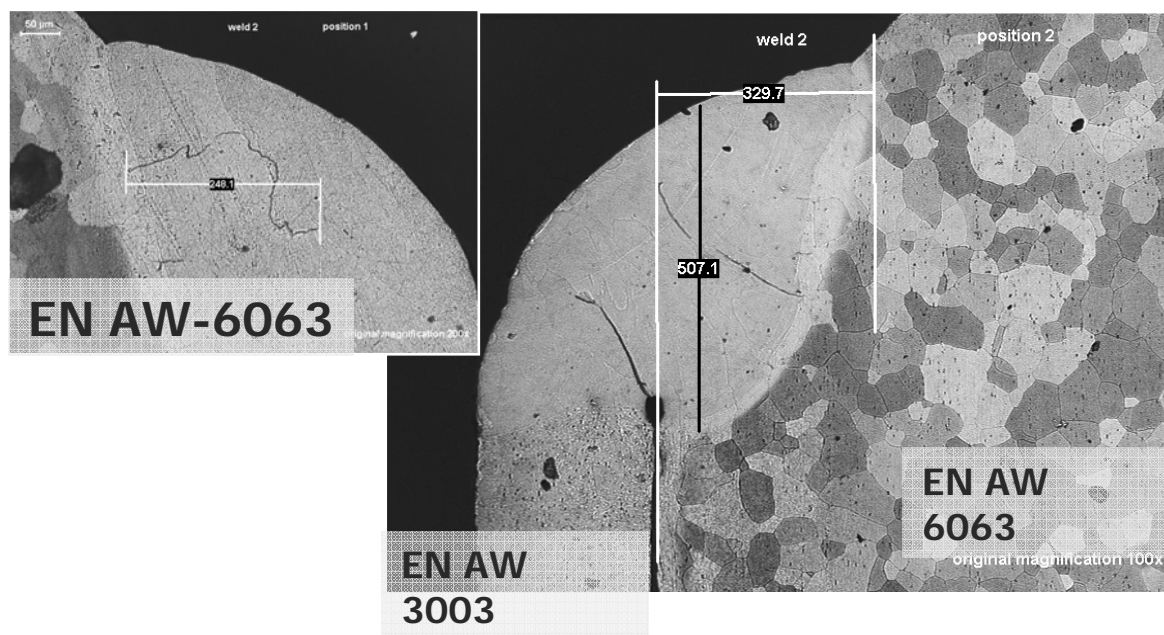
Solidification cracks in autogeneous laser weld of tubes and fittings of the cooling circuit of the ATLAS Pixel experiment involving a 6xxx series alloy: a) laser weld developing a liquation crack; b) in mixed welds (EN AW-6063 diluted with EN AW-3003), where no filler is applicable (laser weld of thin walled components), cracks can develop due to an unfavourable dilution of the two alloys. Locally in the weld bead a critical Mg-Si balance can be present, resulting in solidification cracks [47]. Measured distances in μm .
